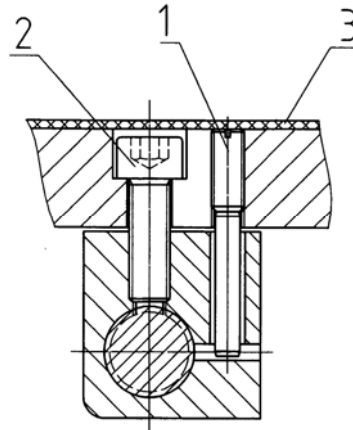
Diagram of adjusting lead screw and nut for bottom tool post
